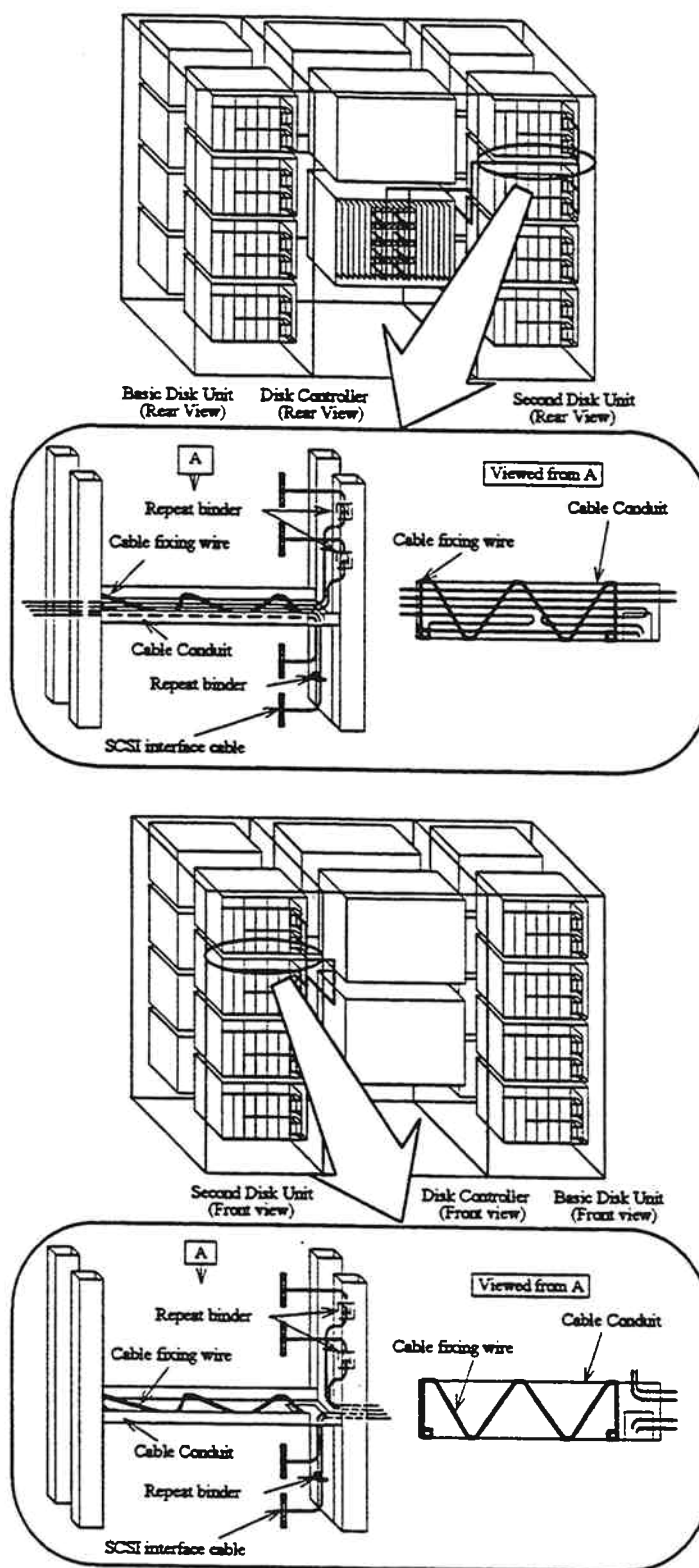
Removal of Cable Clamp
